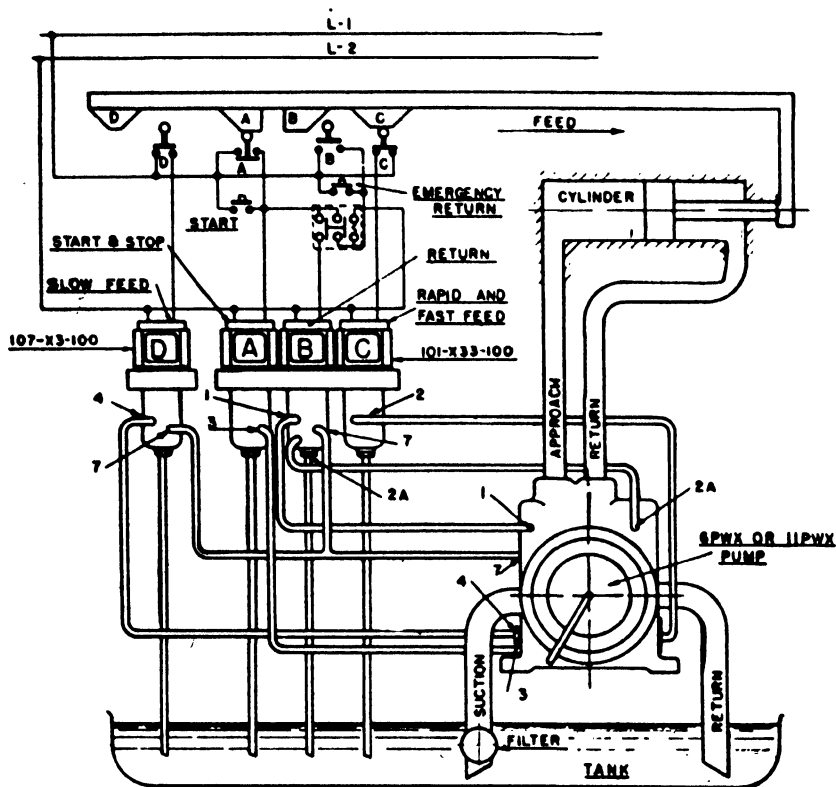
Sundstrand solenoid-pilot-valve-controlled feed circuit. (Sundstrand Machine Tool Co., Rockford, Ill.)
